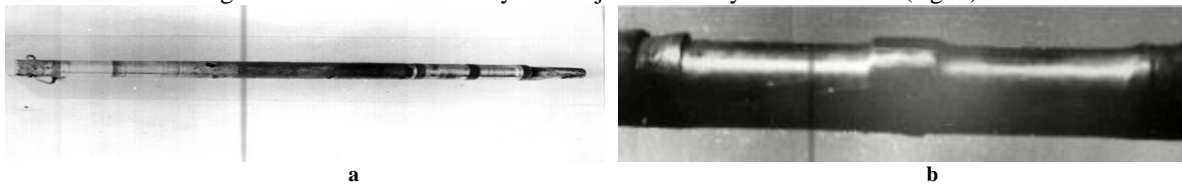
General view of the operation of the drive shafts of the fat seeder (a) and the transmission mechanism (b) when the CCT-12B 480 ha seeder is working
